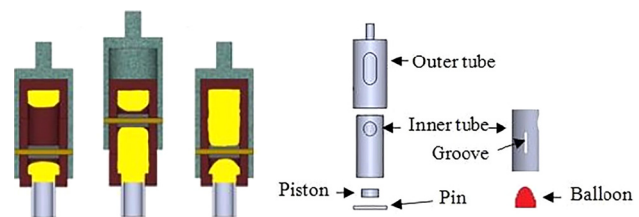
Working principle of the linear actuator (left) and exploded view (right) [25]
